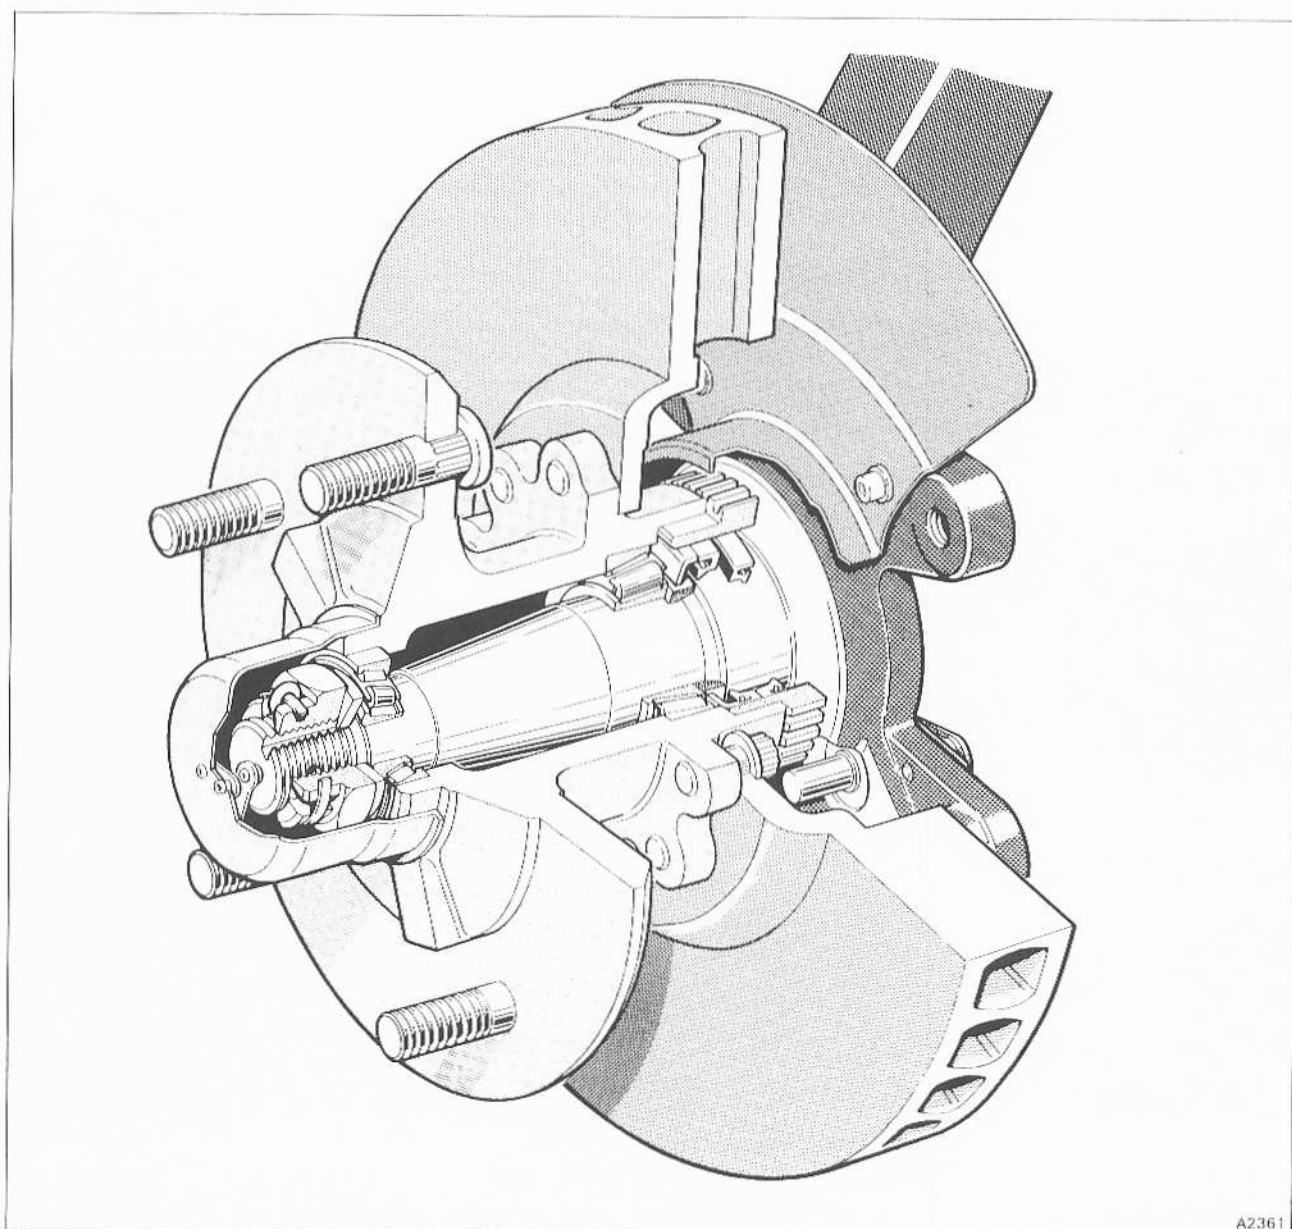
Front hub assembly (Cars fitted with anti-lock braking)
